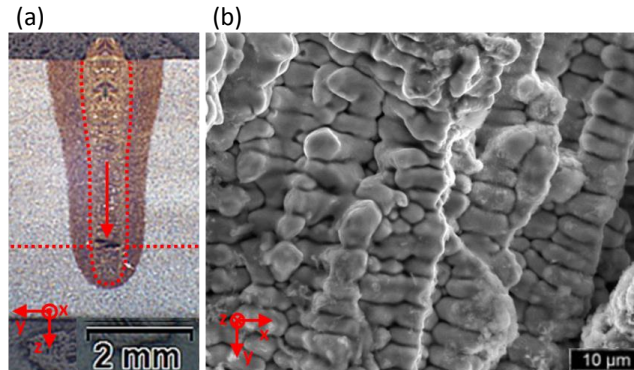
(a) Cross section of a weld in 42CrMoS4 with showing a transverse crack; (b) classical hot crack surface or solidification crack of the weld of picture (a), direction of view marked with red arrow, showing classic hot cracking with free solidified dendrites.
